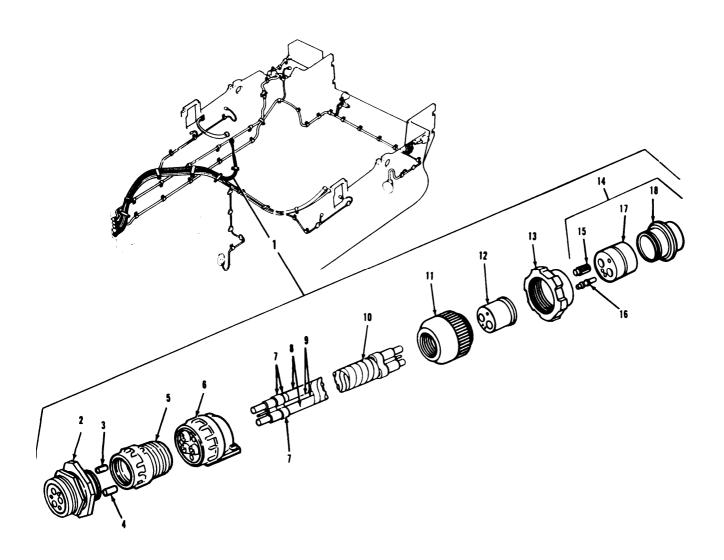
STARTER FEED HARNESS ASSEMBLY (2CA ENGINE).
